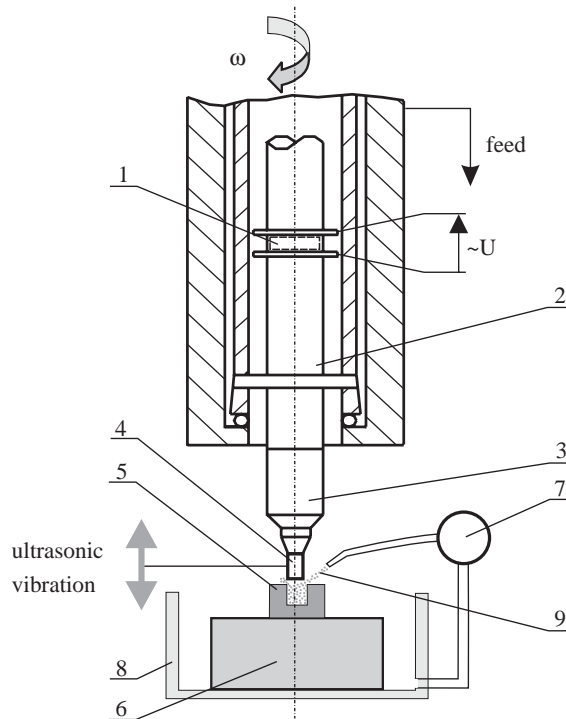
Schematic of rotary USM; 1—piezo-electric element, 2—transducer assembly, 3—coupler, 4—diamond-coated or -impregnated tool, 5—workpiece, 6—fixture, 7—pump, 8—tank, 9—cutting fluid.
